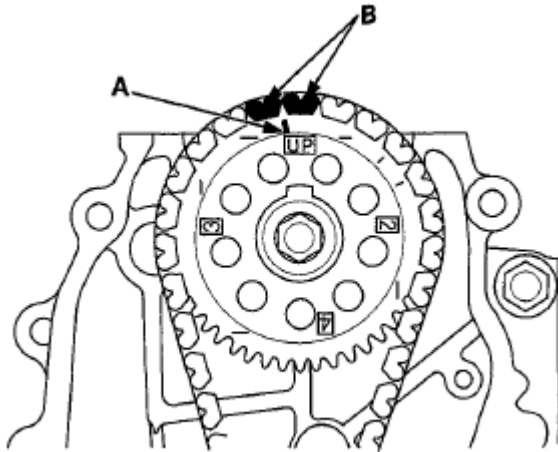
Identifying Camshaft Sprocket Mark Location
